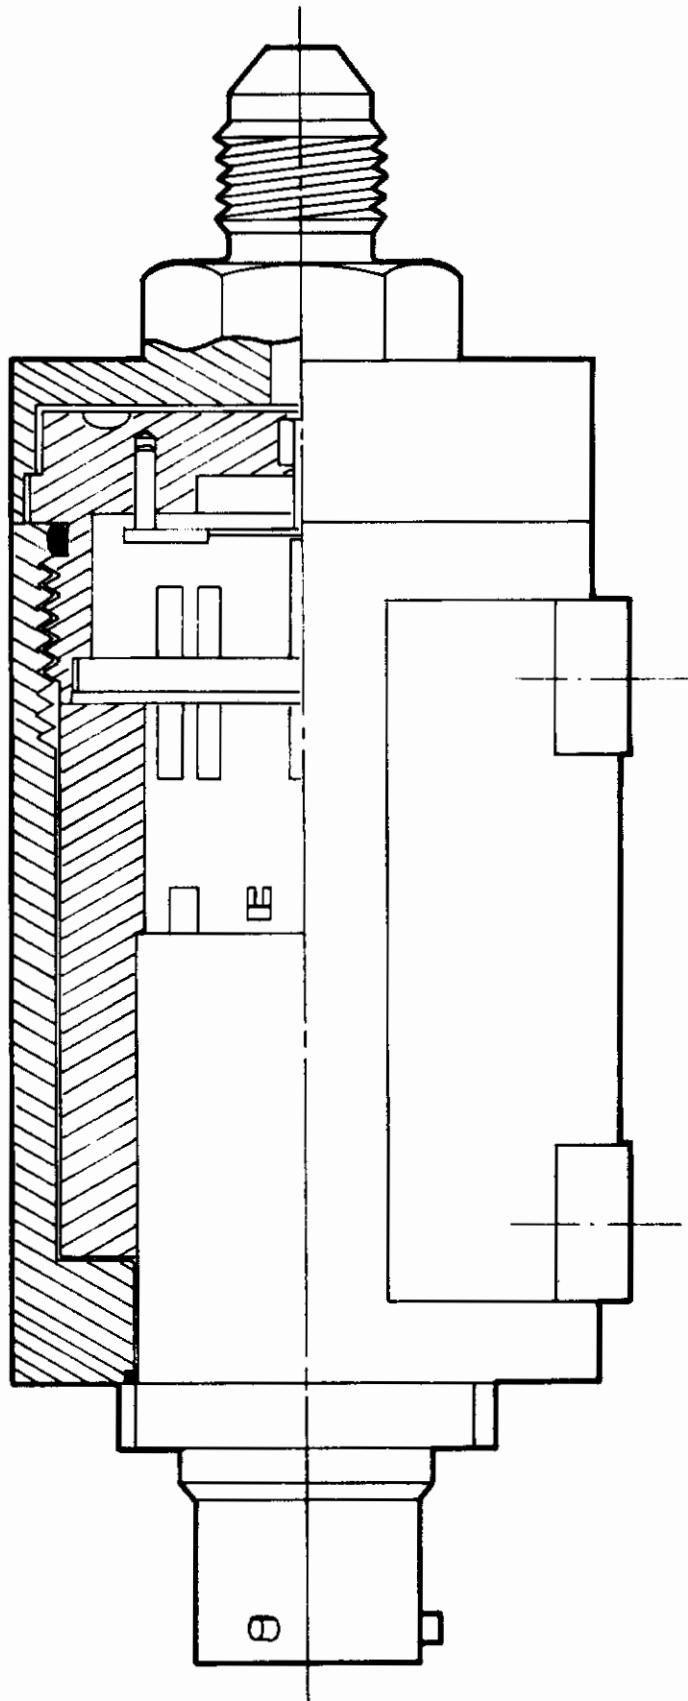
PROTOTYPE DESIGN, SECTIONAL VIEW
